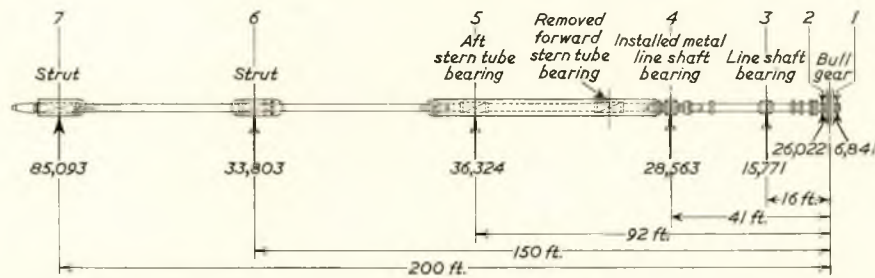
Line shaft and stern tube arrangement of bearings on twin-screw navy ship port unit
